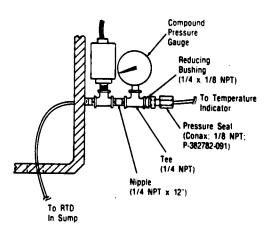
INSTALLATION OF TEST EQUIPMENT.
